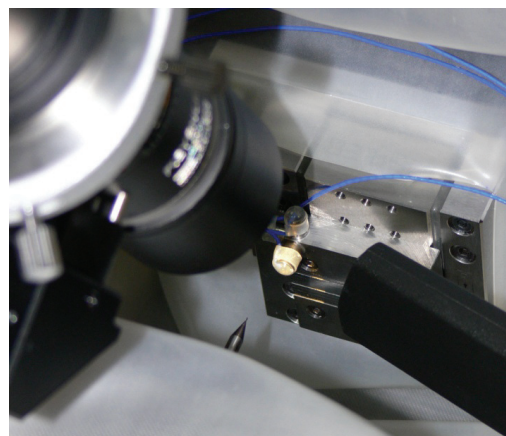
View of dynamometer with workpiece, cutting tool and microscope
